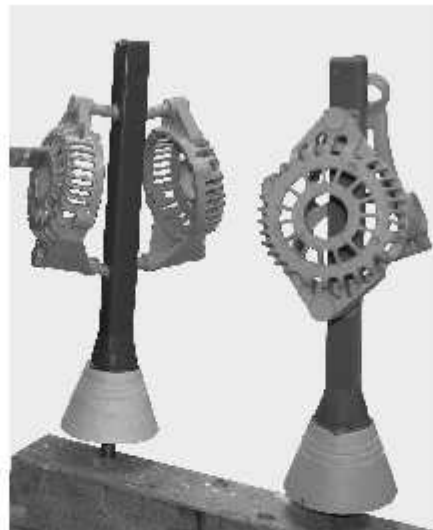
Pattern tooling ready to make the ceramic layer moulds
